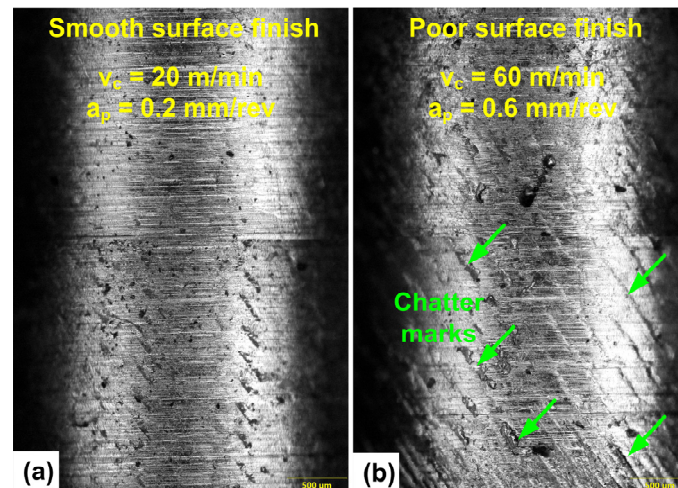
(a) Bore surface indicating smooth finish. (b) Bore surface indicating chatter.
